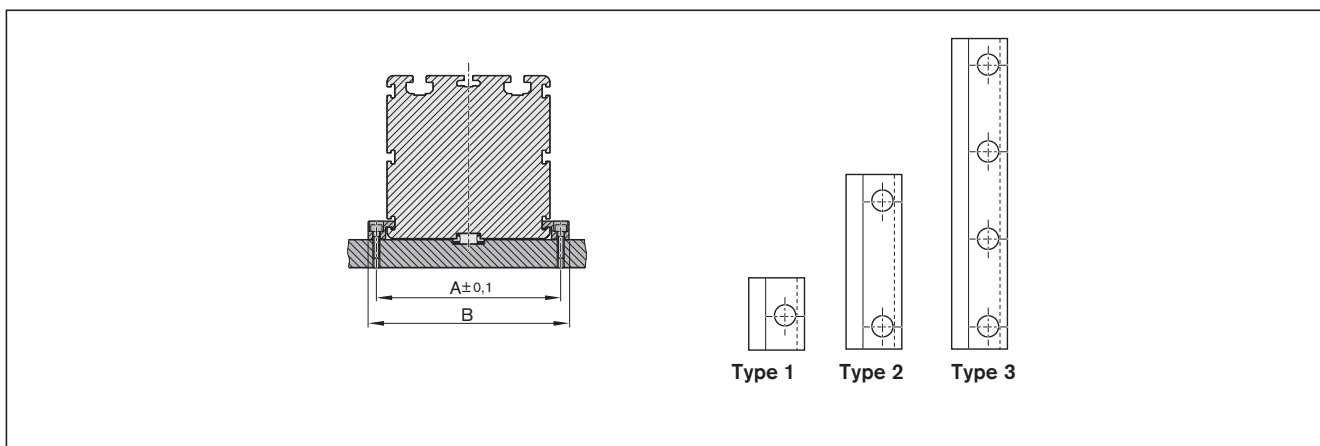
Mounting the VKK by the frame with clamping fixtures
